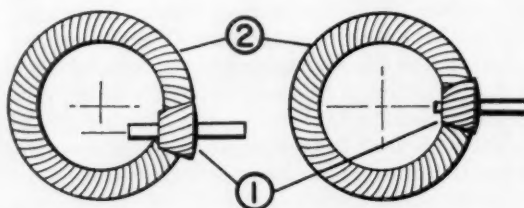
Schematic view of hypoid and spiral bevel gearing showing relationship between pinion and ring gear in each configuration: (1) pinion gears, (2) ring gears.
